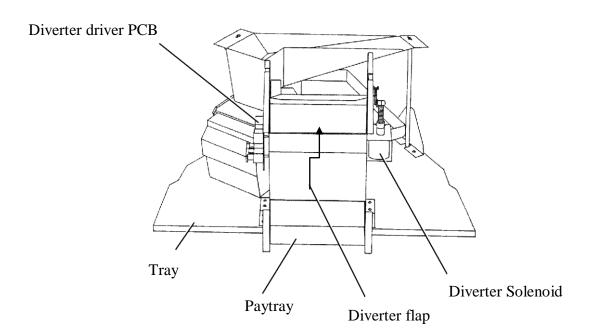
Tray Assembly with Diverter (Cash In/Cash Out Machines)
